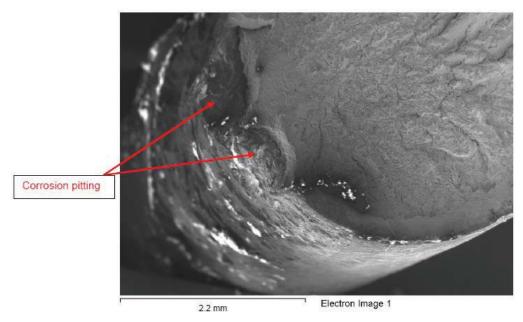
Scanning electron micrograph of wire L65 fracture surface and surface with pitting
